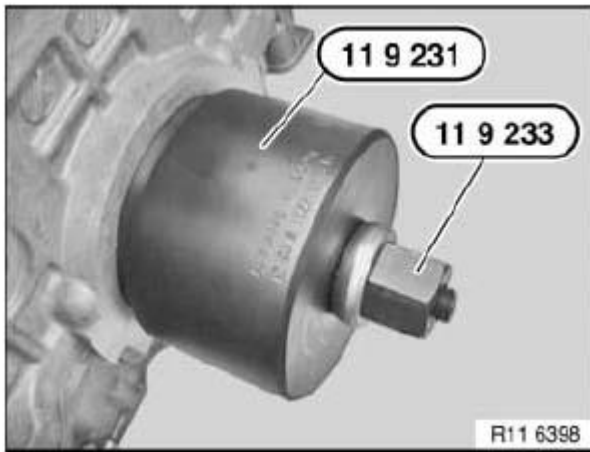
Identifying Special Tool (11 9 231) And (11 9 233)
